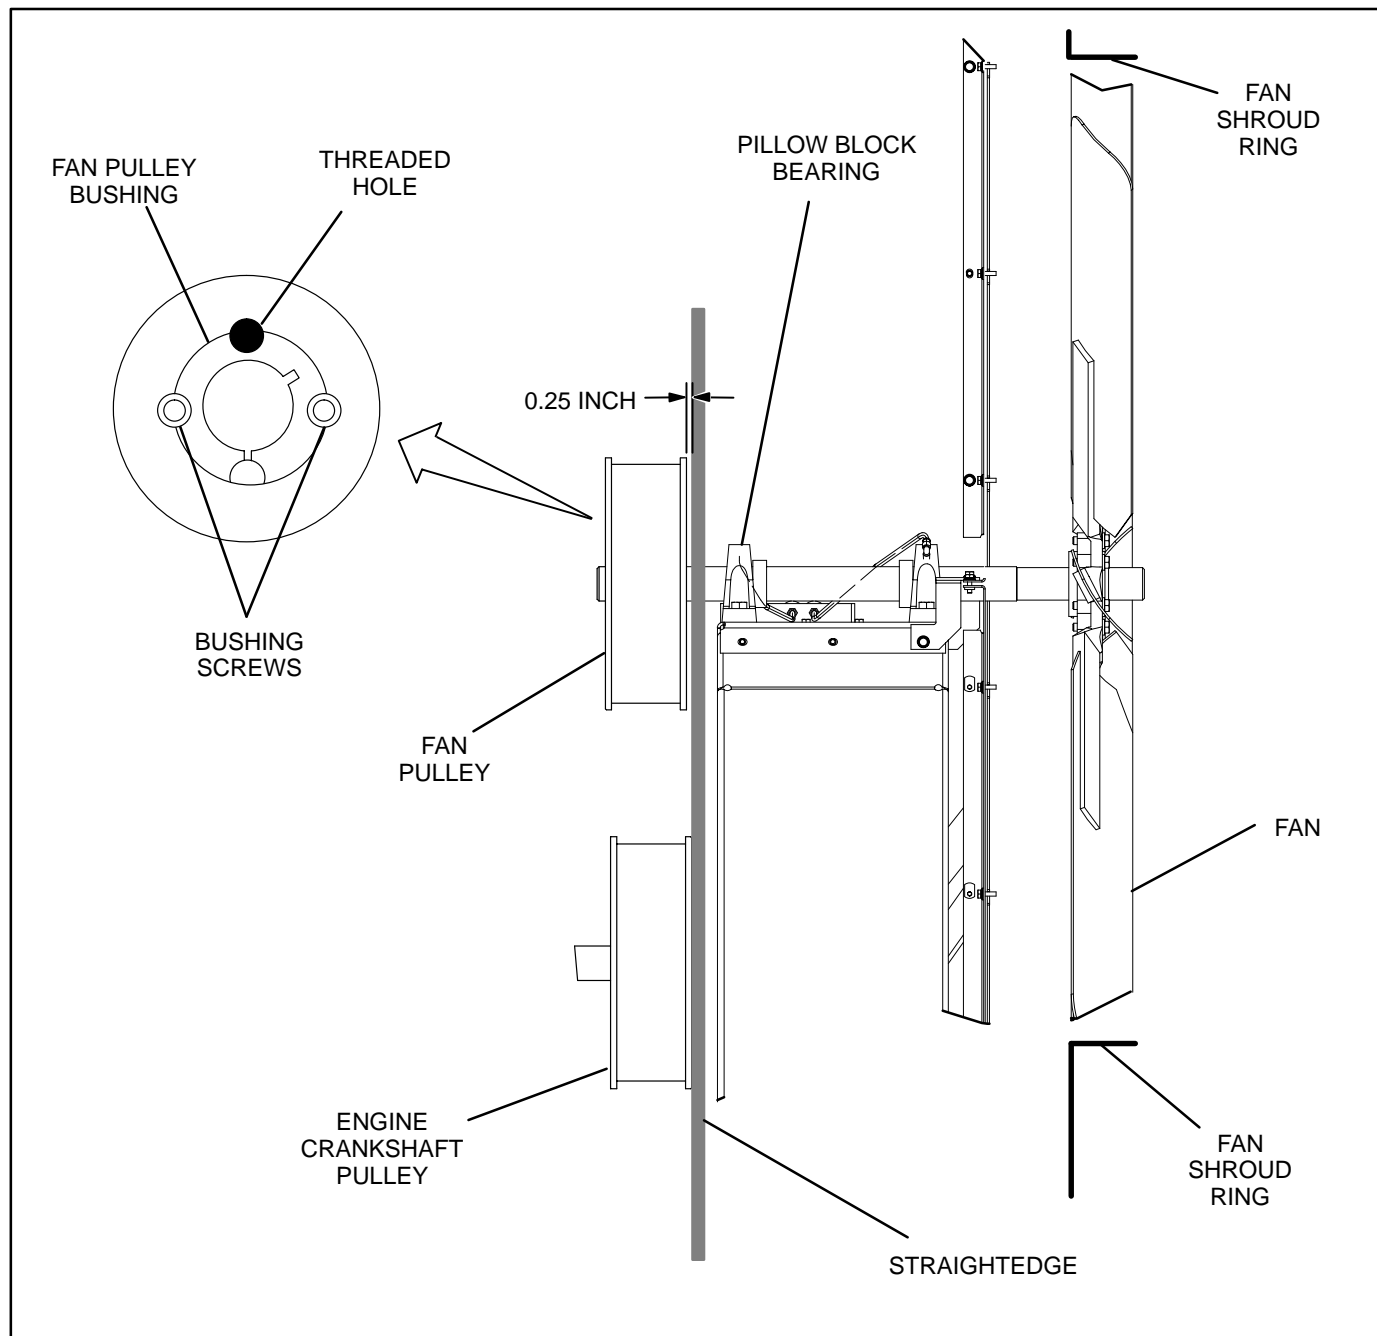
FAN DRIVE PULLEY ALIGNMENT
